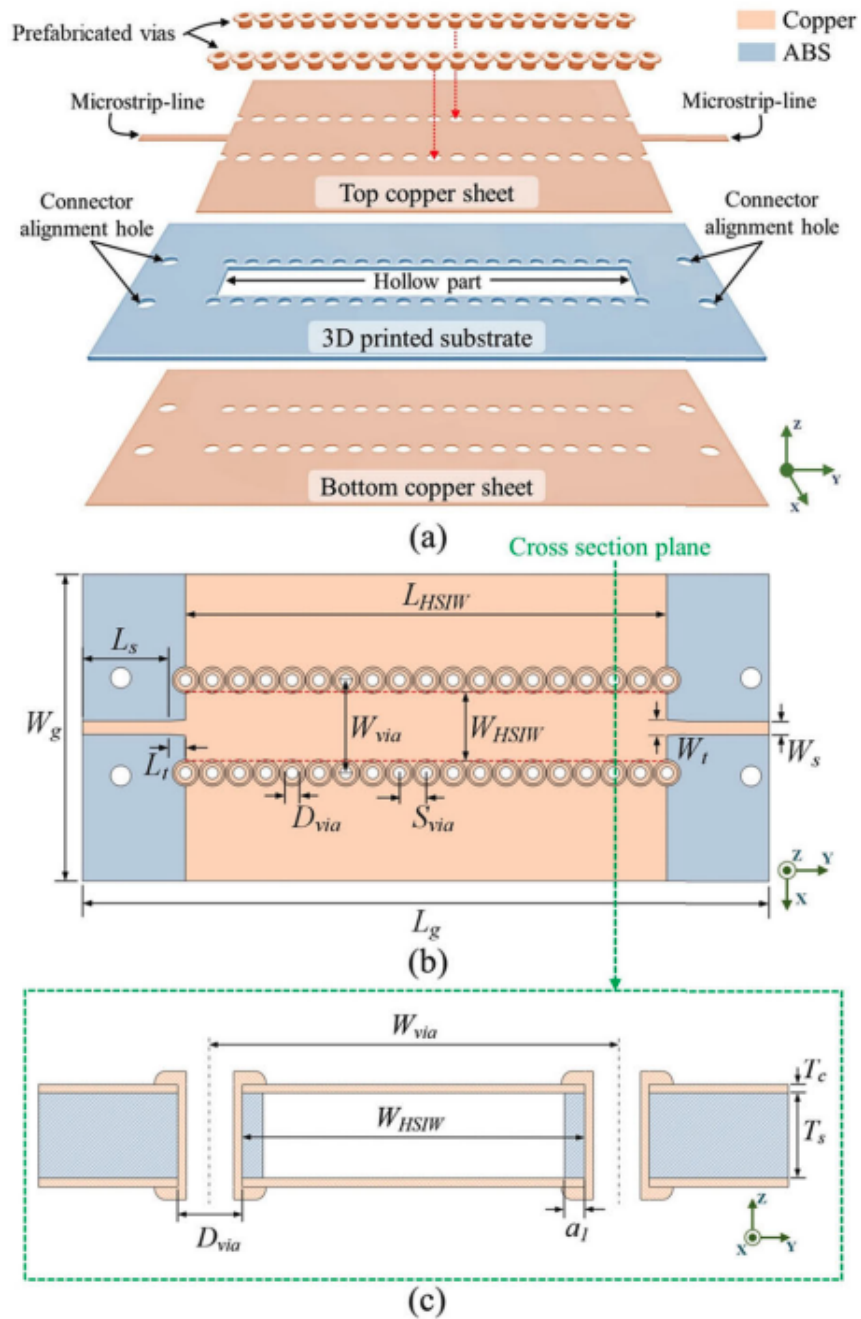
Schematic diagrams of the novel HSIW in this paper: (a) 3D exploded view, (b) top view with all design parameter, and (c) cross-sectional view of the HSIW
